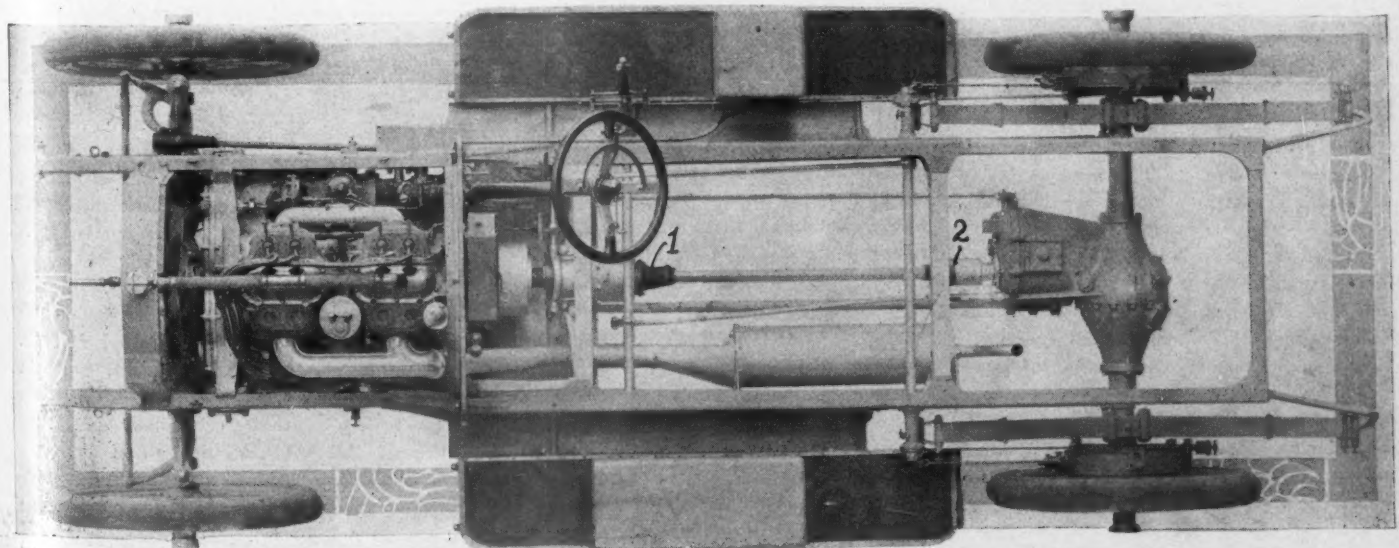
THE GEARBOX IS A UNIT CONSTRUCTION WITH THE REAR AXLE—1 AND 2 SHOW UNIVERSAL JOINTS
